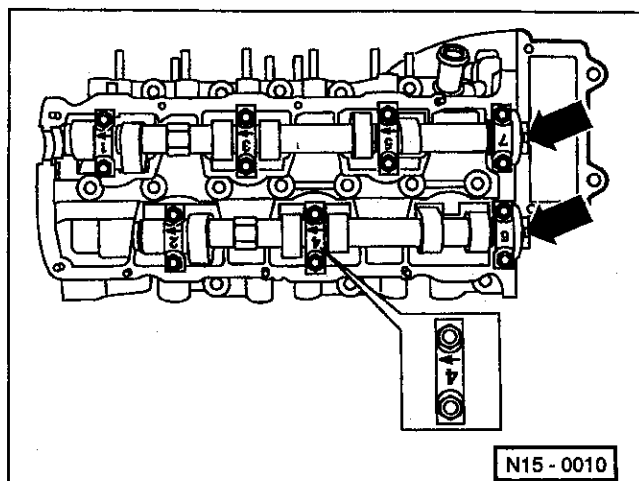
Install bearing caps so that arrow faces vibration damper and numbers can be read from exhaust side of engine (Inset).
